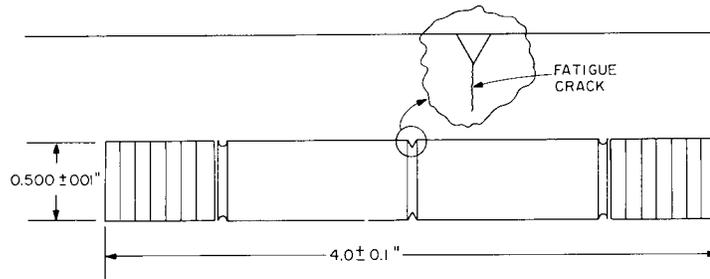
The notch-fatigue specimen in the final form for tension testing
